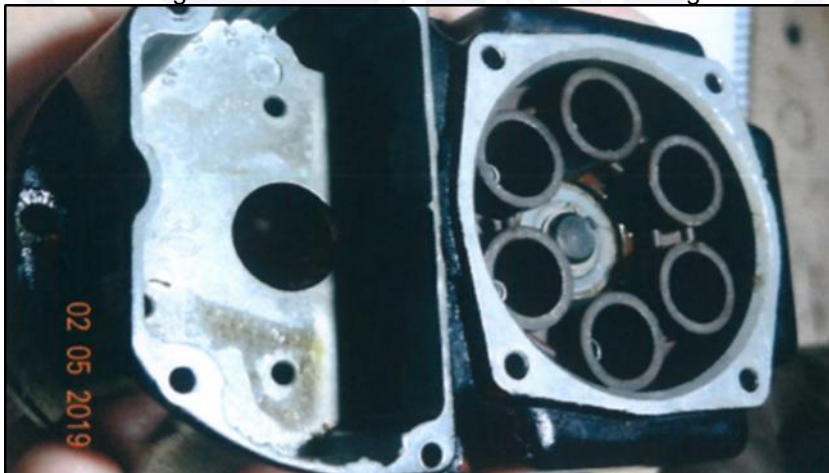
Lubricating oil residue on the base of the contact breaker.
